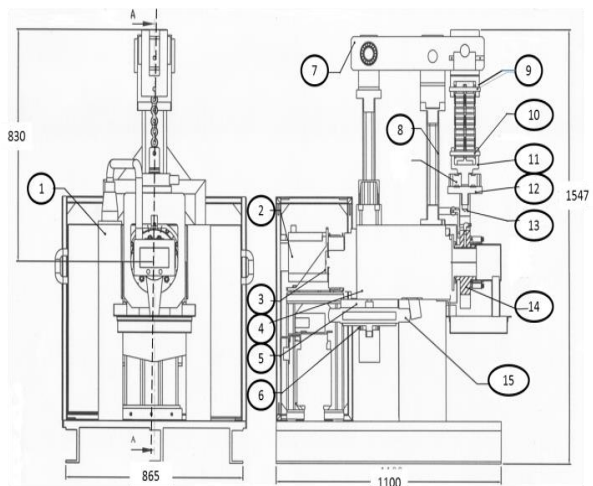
Diagram of Journal Bearing test rig. 1) Support structure, 2) Motor, 3) Motor bracket, 4) Spindle assy. 5) Bellow top plate, 6) Bellow guide plate, 7) Loading Lever, 8) Pivot assembly, 9) Chain, 10) Chain holder, 11) Load Cell holder, 12) Load Cell, 13) Loading plate, 14) Journal bearing and 15) Pneumatic bellows
